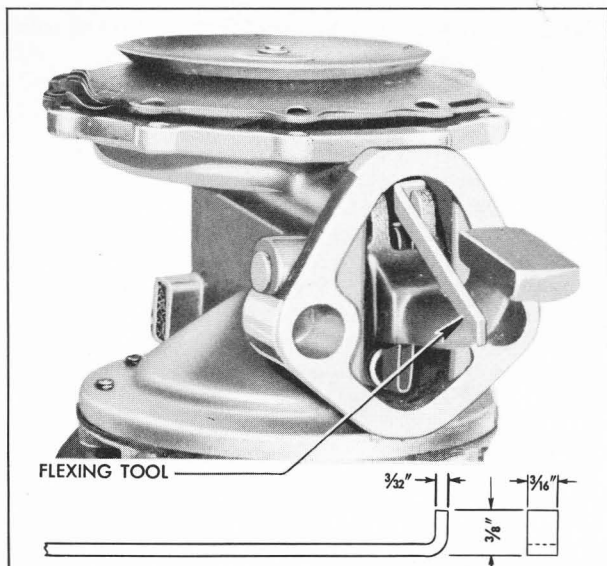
Vacuum Diaphragm Flexing Tool in Place
